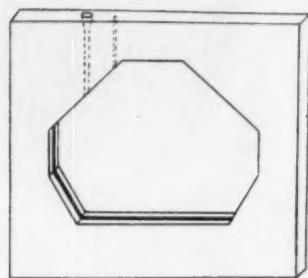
Matchplate with pouring hole, vent holes and groove in side opening ready for insertion in pattern.
